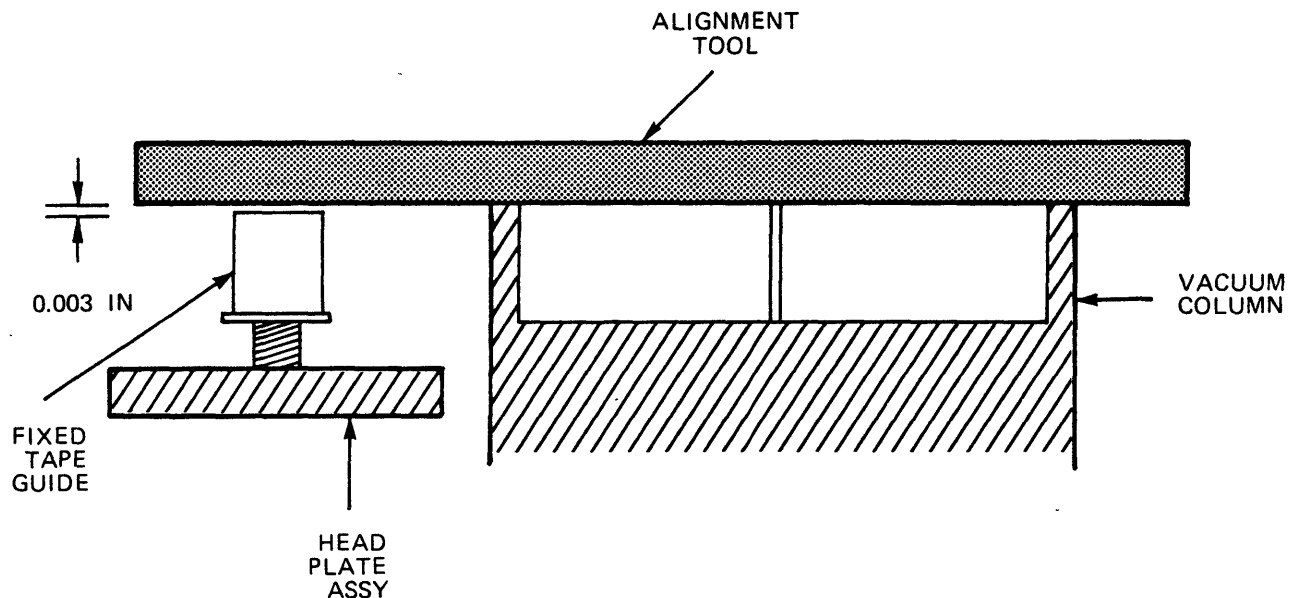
Tape Guide Roller Alignment Tool Positioning
